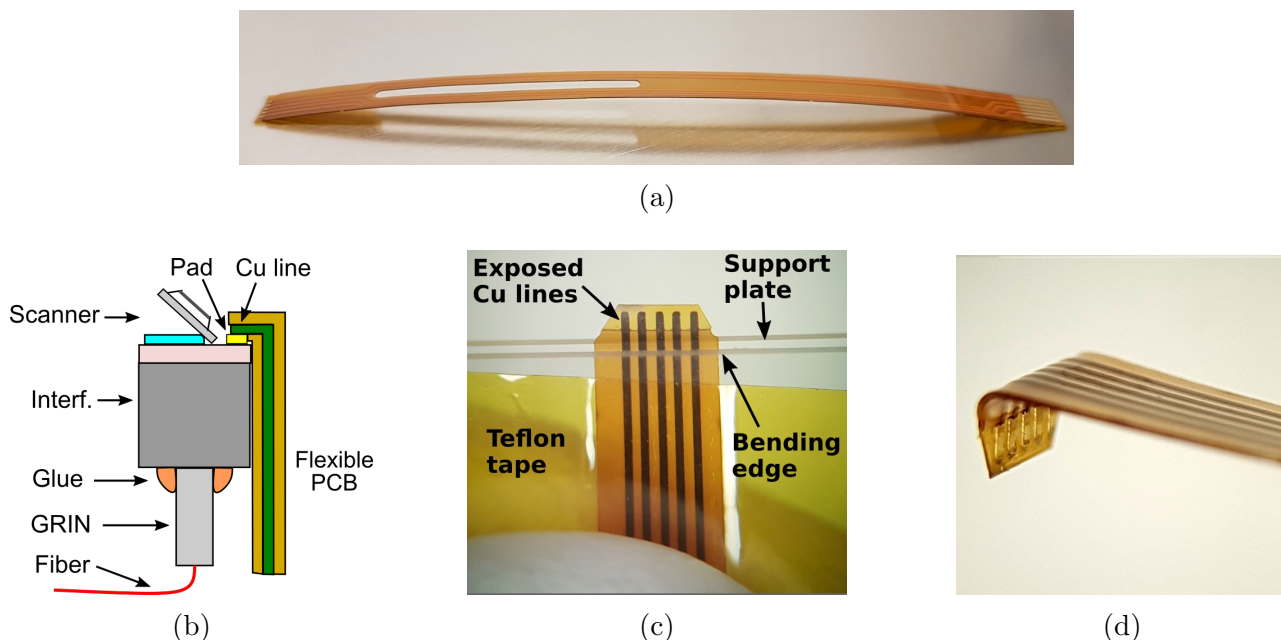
(a) Flexible PCB. (b) Diagram of the integration of the PCB on the pads of the scanner. (c) The PCB is placed between two glass plates for bending. (d) PCB bent at 90°.
